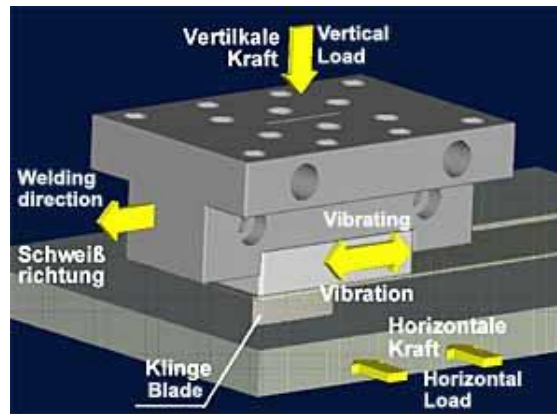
A schematic illustration of Viblade™ welding [59]
